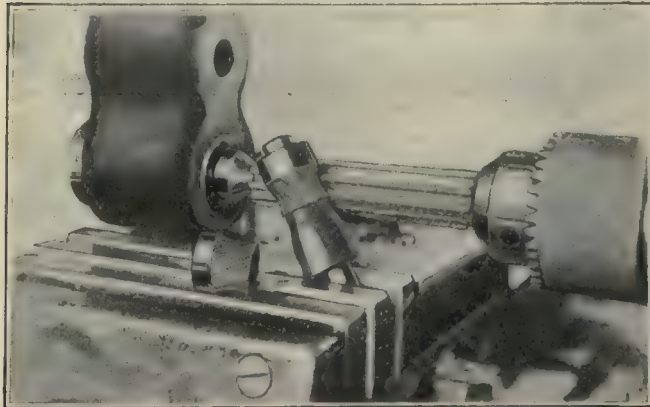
CUTTING THE FILES IN THE MILLING MACHINE
